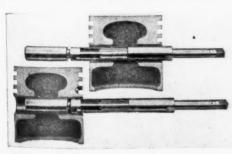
Bottom. Cutter entering first bushing. Top. Entering second bushing guided by rear pilot
